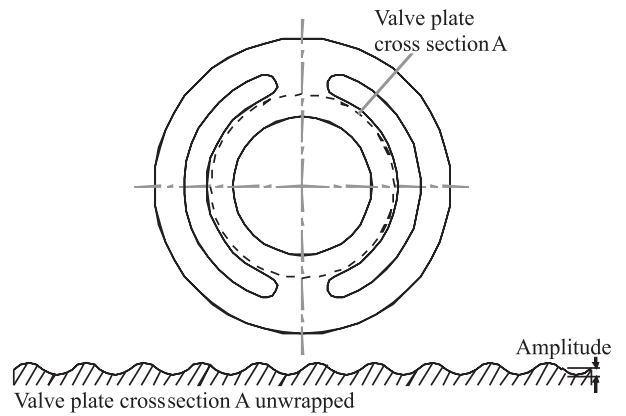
Illustration of the waved surface for a typical unwrapped cylindrical cross-section of the valve plate
